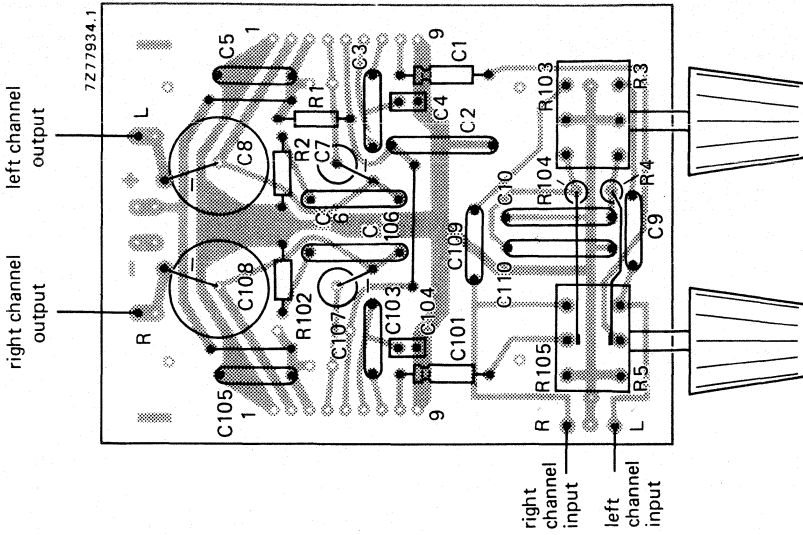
Component side of printed-circuit board showing component layout used for the circuit of Fig. 12. Balance control is not on the p.c. board.
